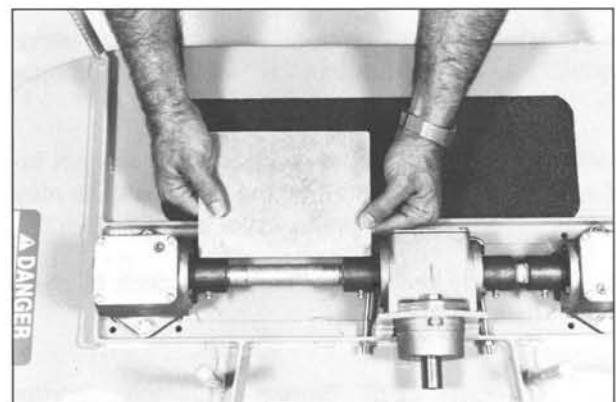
Align Gearbox Mounting Position Using Straight Edge
